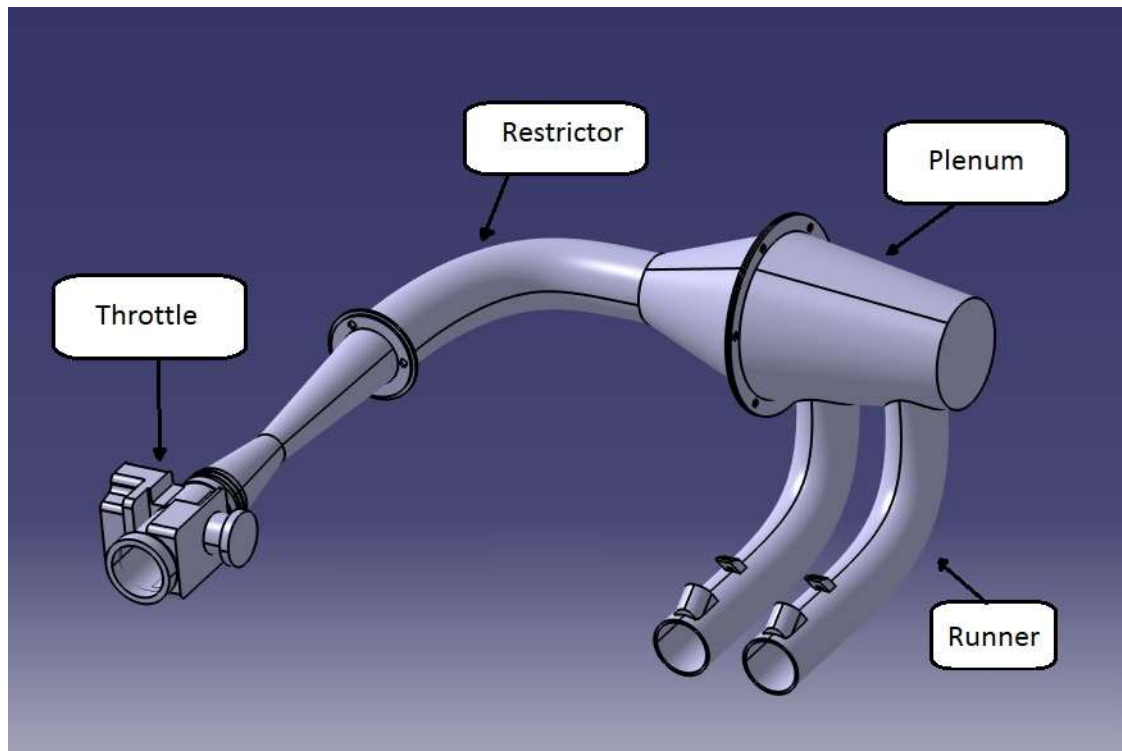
The designed engine intake manifold in CATIA, showing filter, throttle, restrictor, plenum, runner, and engine.
